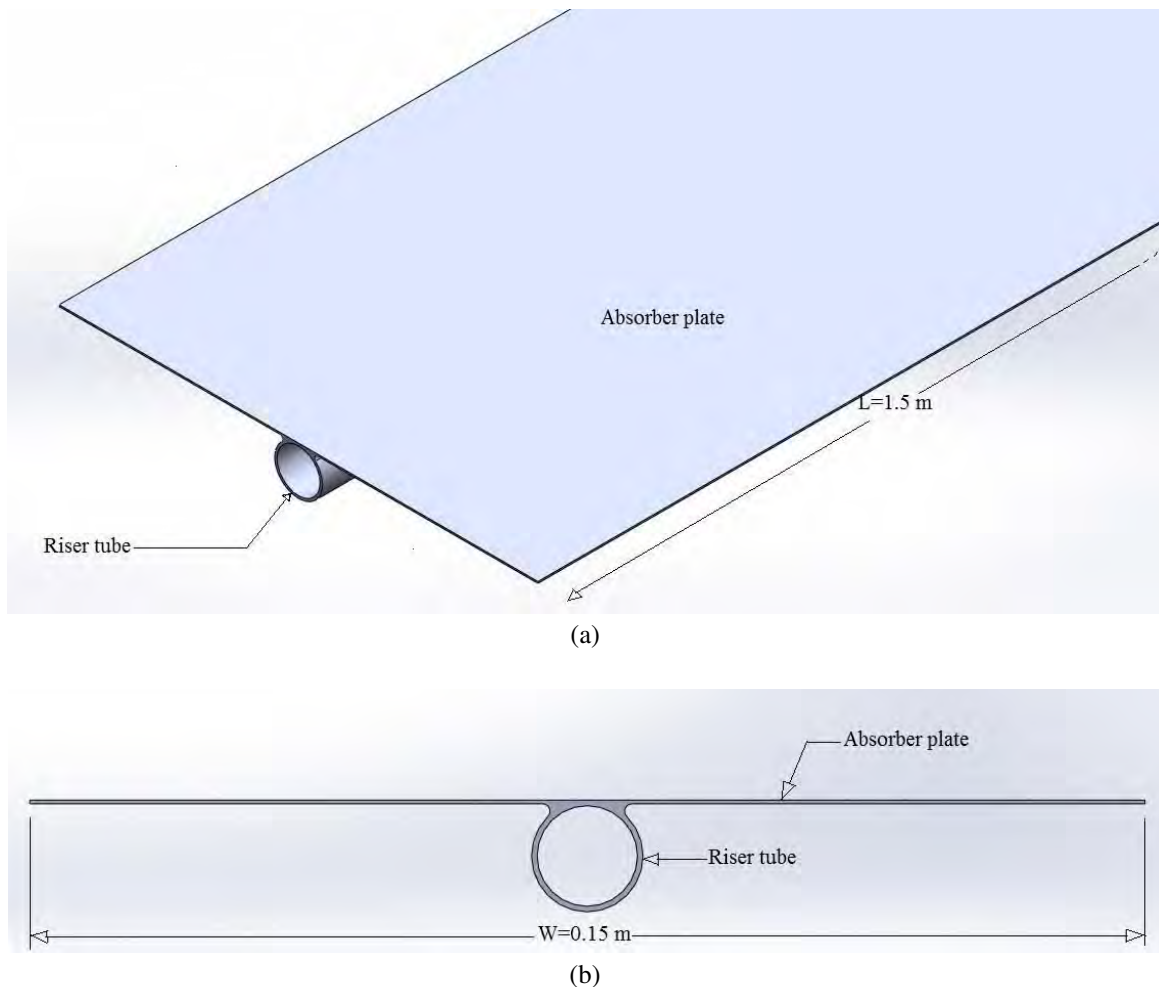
(a) Isometric view, (b) Cross section view of the flat plate collector model
